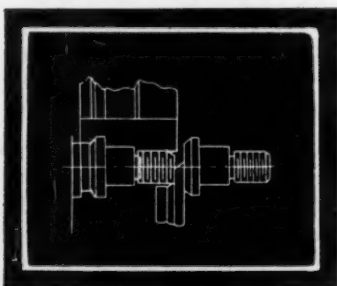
Simple forms can be finished with one tool when the length is not too great
